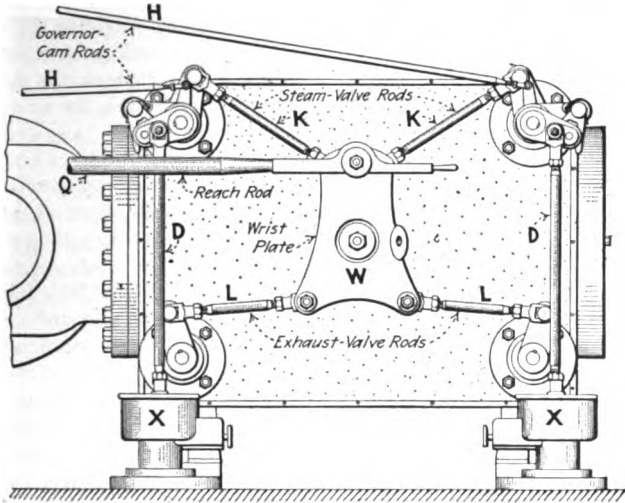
Valve side of Fulton Corliss engine cylinder. (Fulton Iron Works Co., St. Louis.)
